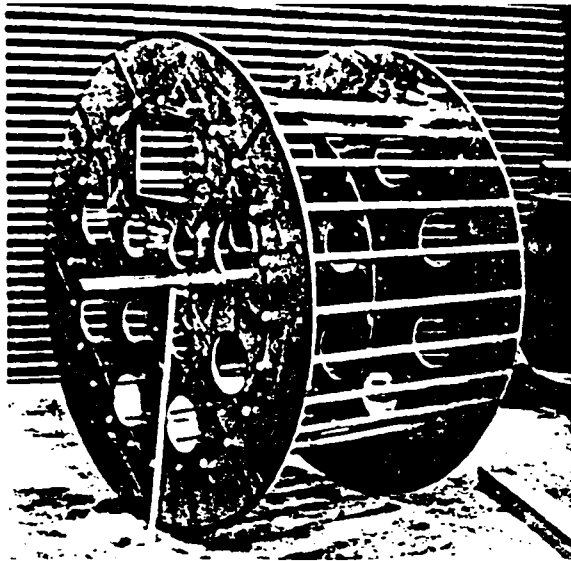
The cable drum support discs were cut round with a metal band saw. Next, the discs were gang drilled for all the hole patterns. Twenty-four holes in the discs serve as sockets for the spacer rods that form the drum support structure. A metal inert gas (MIG) welder is used to weld the rods to the discs. A 70-mm thick skin is clamped over the support rods and welded as seen in Figure 4b.
